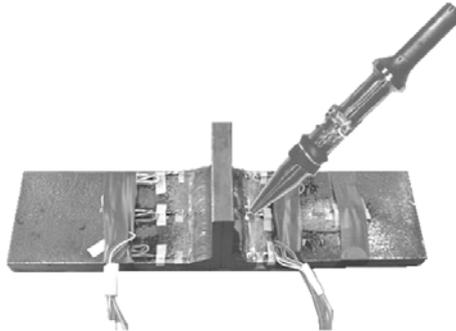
Specimen with strain gauges at weld toe and instrumented hammer peening tool.
